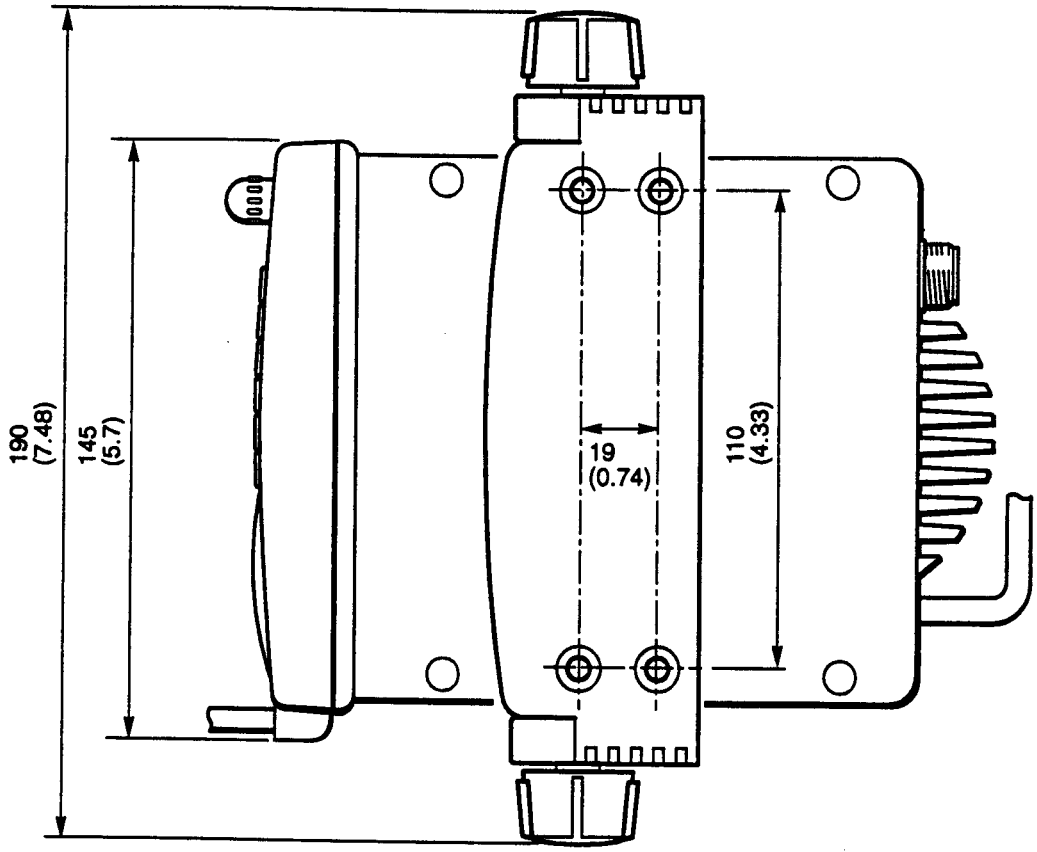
OUTLINE AND MOUNTING DIMENSIONS
